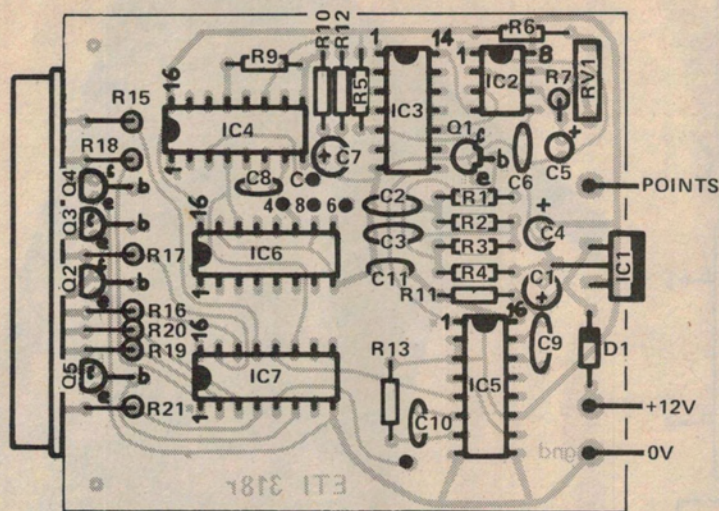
The component overlay for the board. The board is double sided although only the lower surface is shown here. Note the link between the two surfaces of the board near C10.
